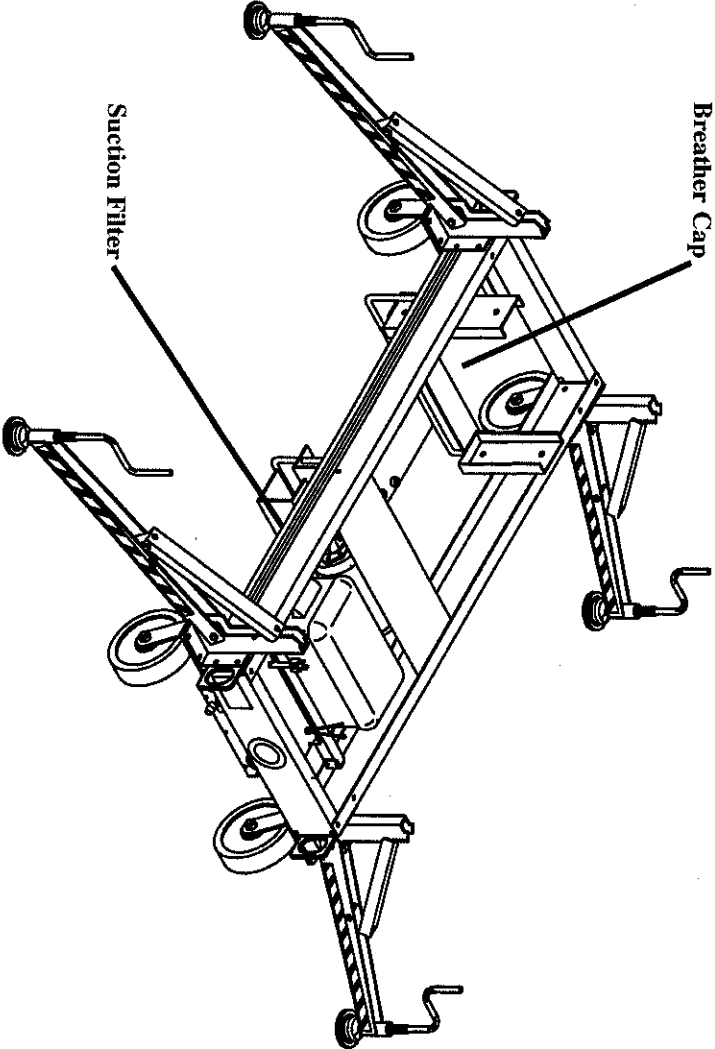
Filling Hydraulic Reservoir and Checking Hydraulic Oil Filter
